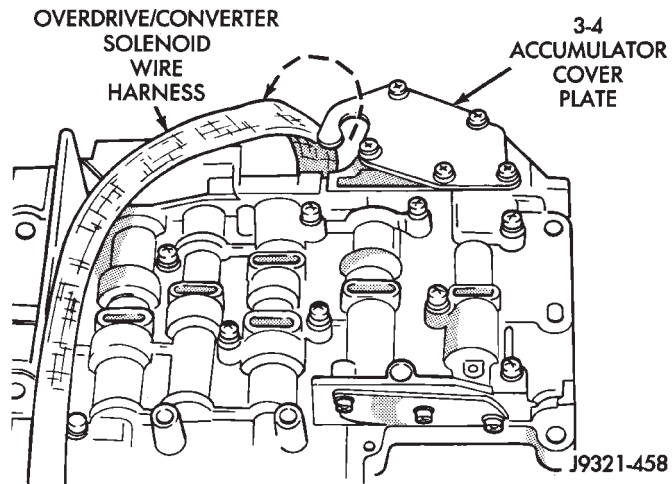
Unhooking Solenoid Harness From Accumulator Cover Plate
